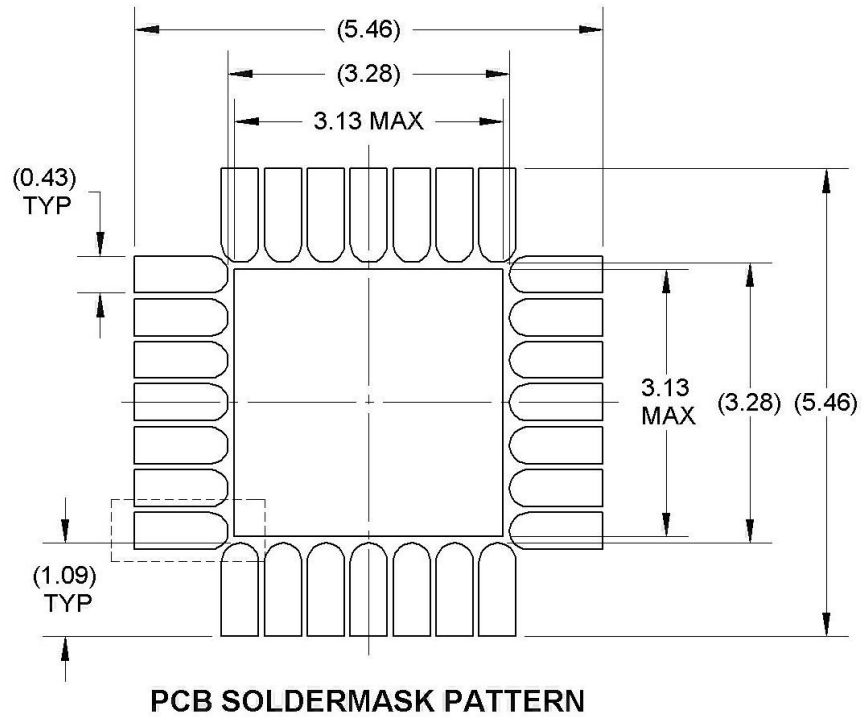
MLF28 Solder mask Dimensions (millimeters)
